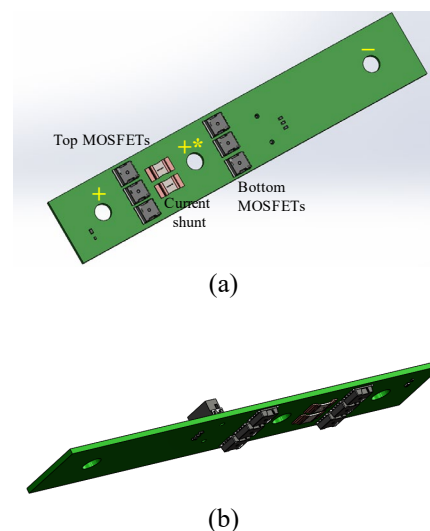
(a) Bottom view of the bypass PCB, (b) 3D view showing the components on both top and bottom side.
